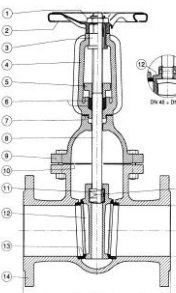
Gate Valve PN 16 - OS&Y Oval Body
